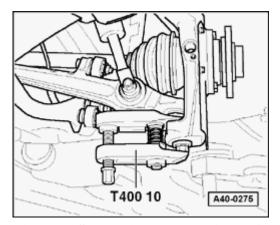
Separating Lower Link Joint Pin From Tapered Seat Using Ball Joint Puller T40010 Courtesy of VOLKSWAGEN UNITED STATES, INC.
